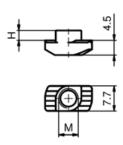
Dimensions hammer screws and hammer nuts AXF
